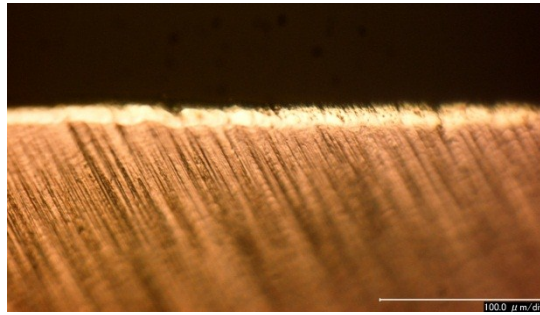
Tool wear width of Tool No.1 (Helix angle  $0^\circ$ ) (Up cut method)
